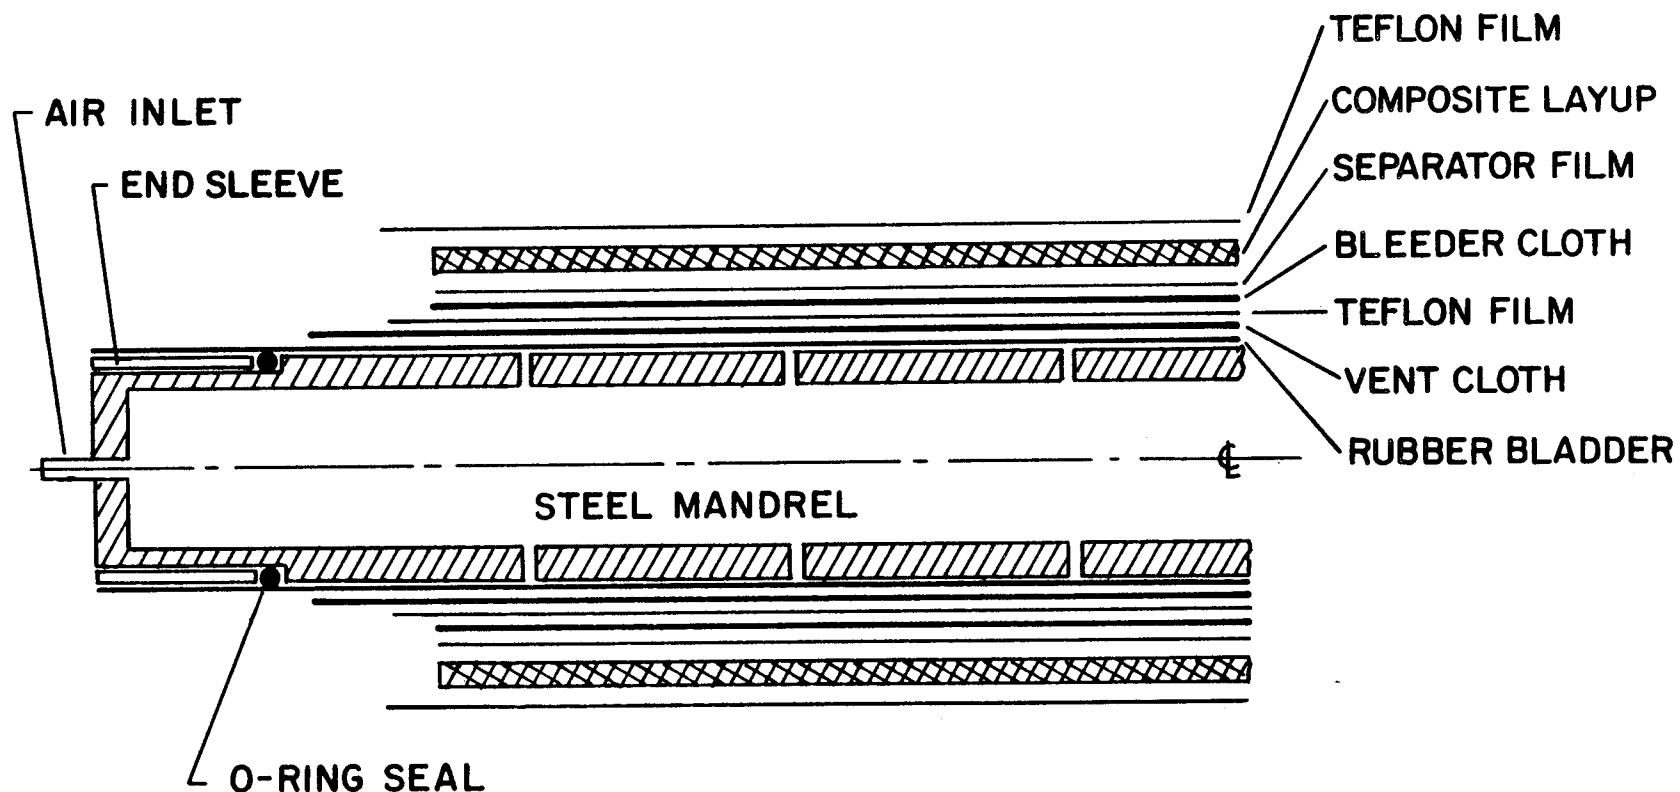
Sketch showing the center steel mandrel and the sequence of material layers employed in the composite laminate tube fabrication.
